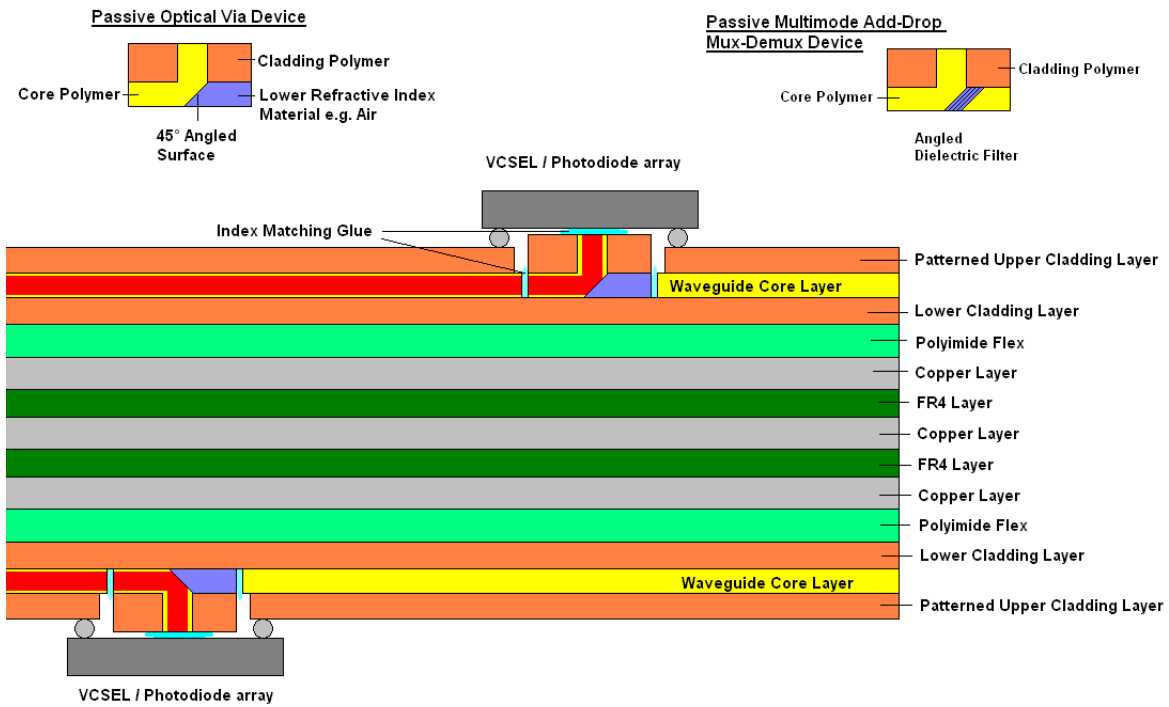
Electro-optical printed circuit board with optical sockets housing optical transceiver devices and out-of-plane deflection structures
